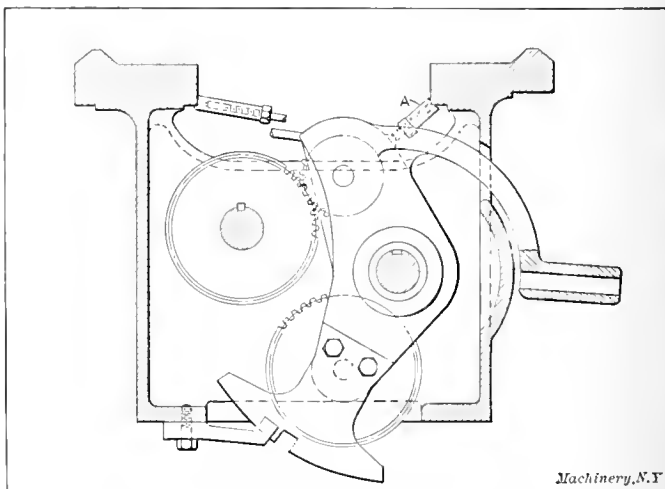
Method of Holding Tumbler when Drilling and Reaming the Locking Pin Holes by the Method shown in Fig. 8
